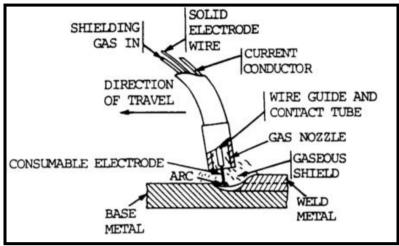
Schematic sketch of welding torch & description of various parts.
